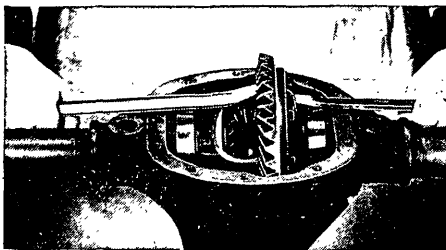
Method of removing differential pinion shaft lock pin in type having shim-adjusted bearings
